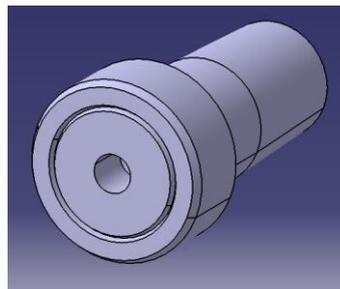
Groove and hole in the end face of the 7J-V17 (new)
